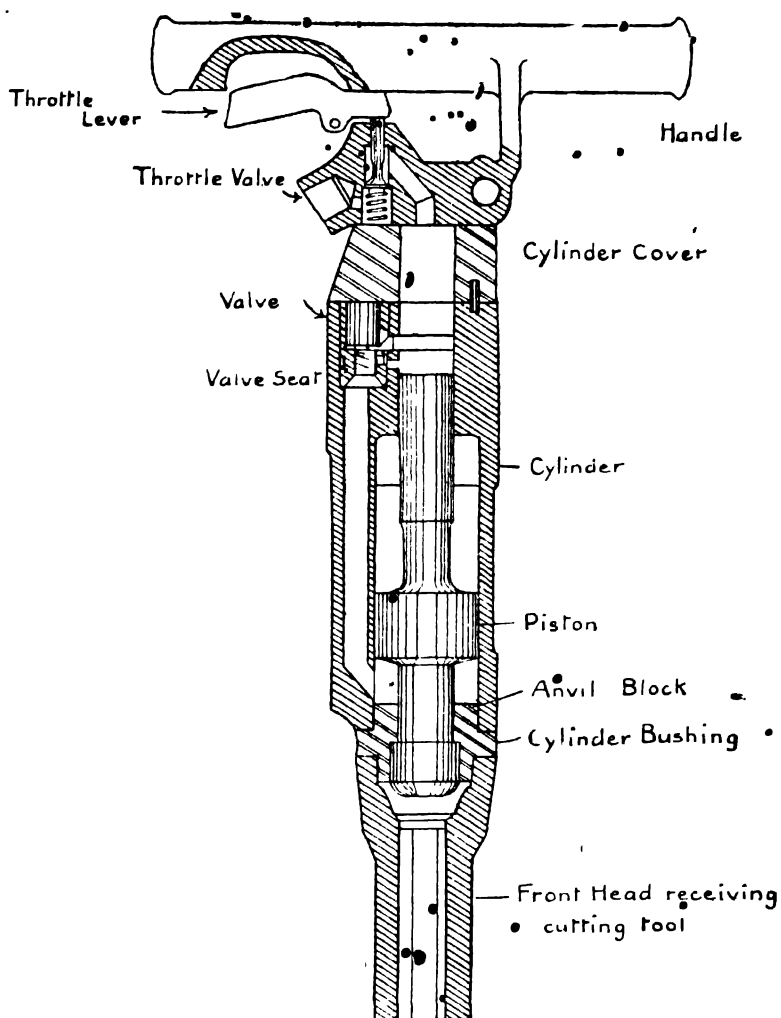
Detail of Compressed Air Paving Breaker (Ingersoll Rand pattern).
